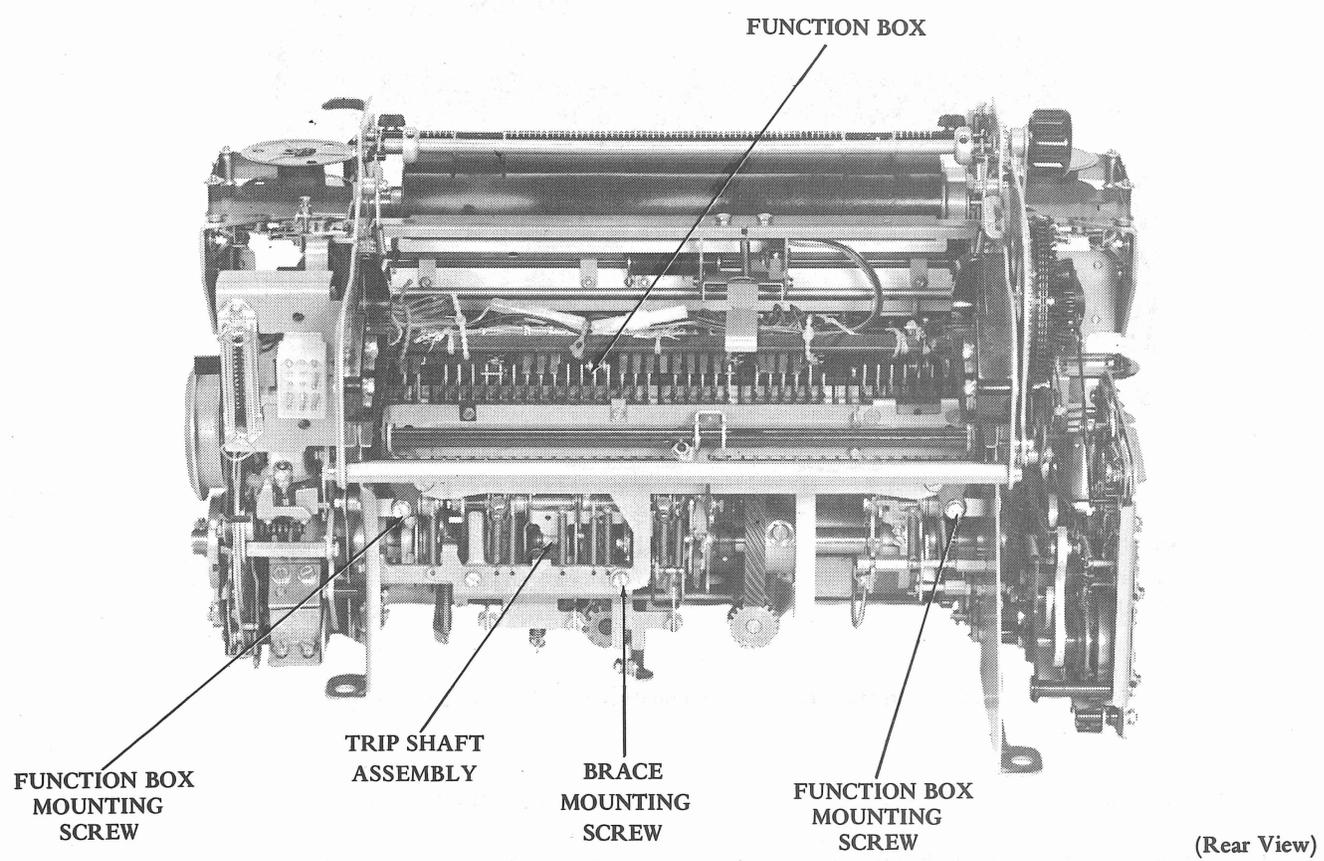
Function Box and Trip Shaft Assembly – Standard Typing Unit
